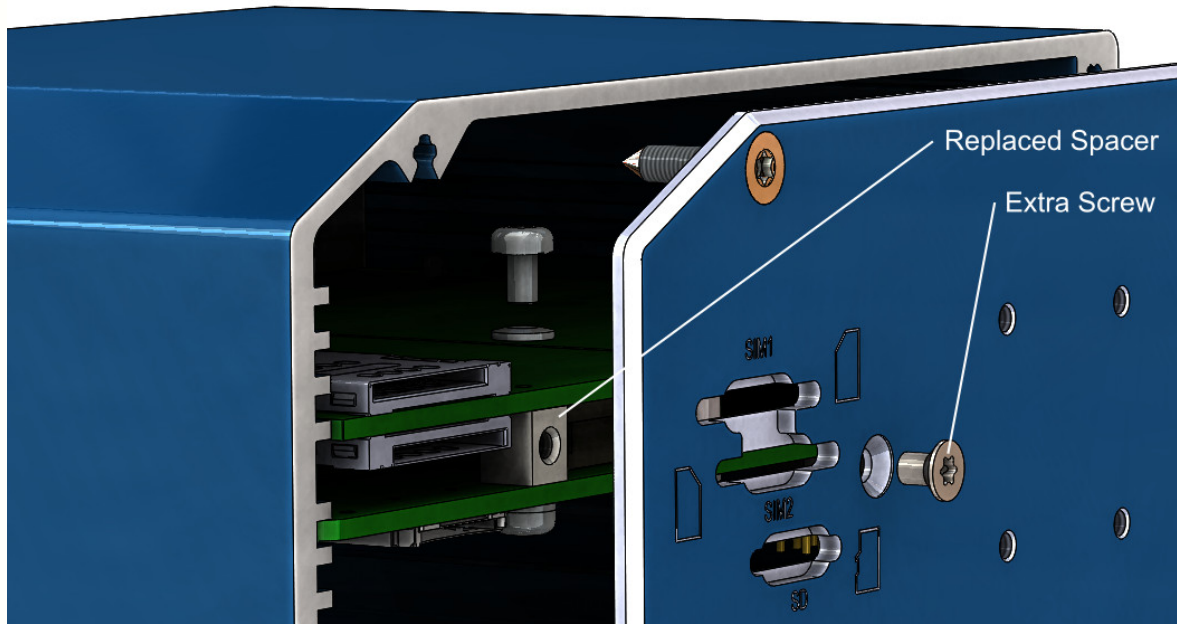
Assembly view – rear panel of the router (SmartFlex, SmartSwarm)
